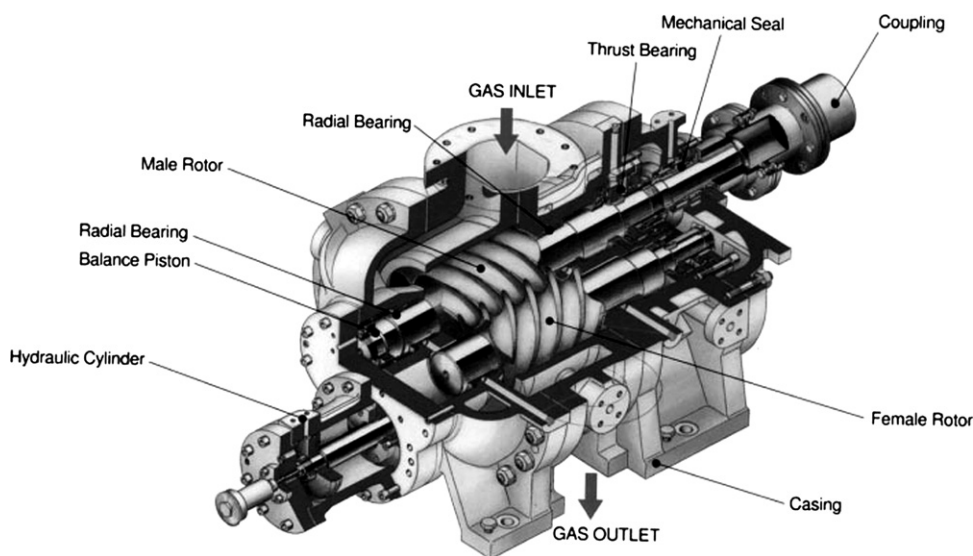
• Oil injected twin screw compressor (Courtesy of Kobelco-Kobe Steel Ltd.)
